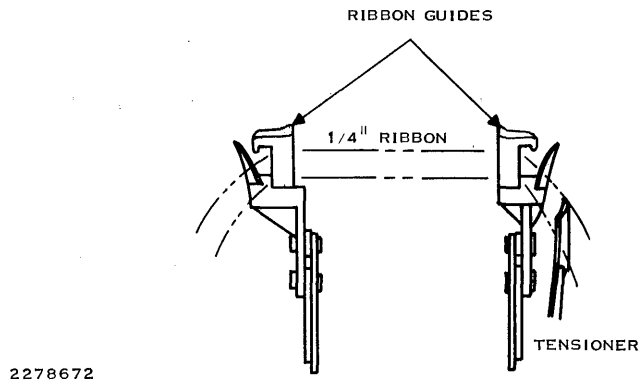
Model LQ45 Printer Ribbon Guides and Tensioner
